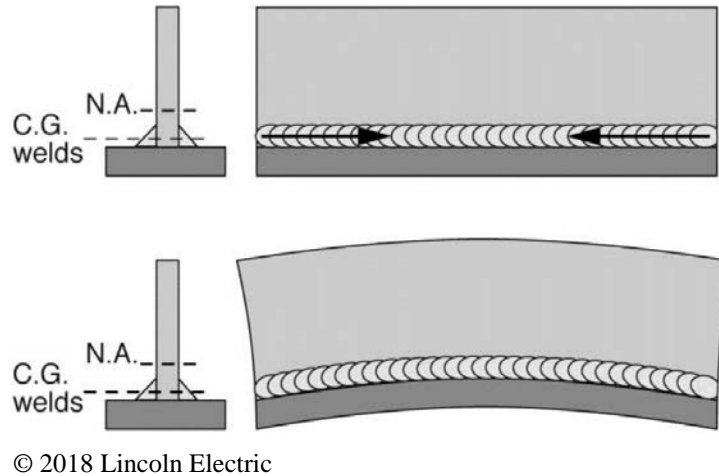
Illustration. Longitudinal camber due to longitudinal shortening.
